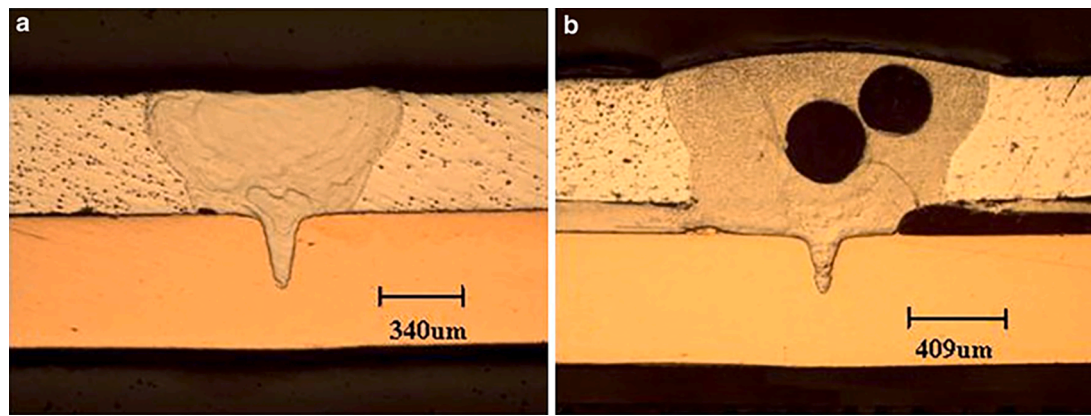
Al-Cu laser weld (a) without Sn filler metal (b) with Sn filler metal [106].
